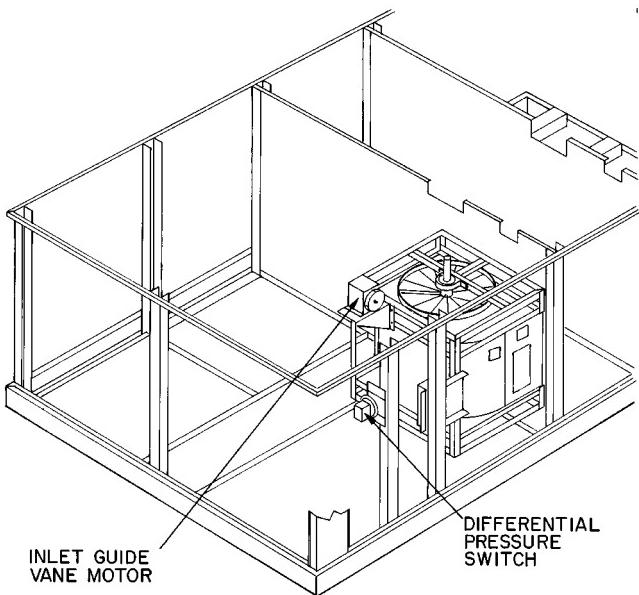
Location of Differential Pressure Switch and Inlet Guide Vane Motor (50DY Units)
